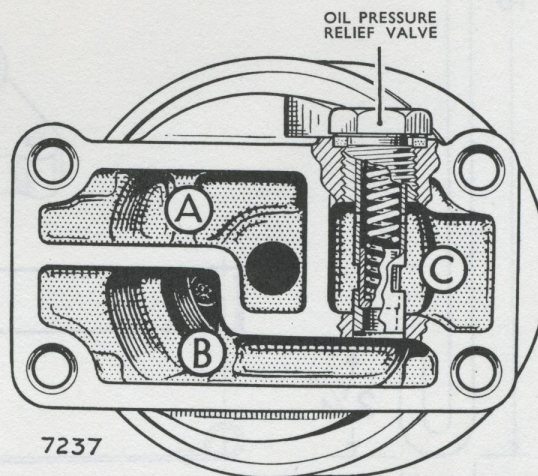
Throw away type full flow filter—oil pressure relief valve
